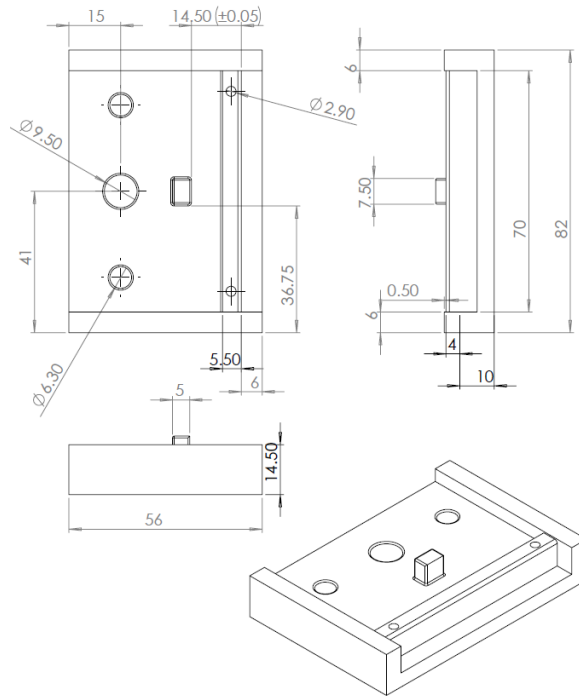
Technical drawing of aluminium clamping base. With one large hole(9.5mm) for fixing the clamping to the shaker, a rectangular cube positioned 14.50 mm from the free-end clamping ensuring constant free length of the cantilever and two screw holes for fixing the top clamping.
